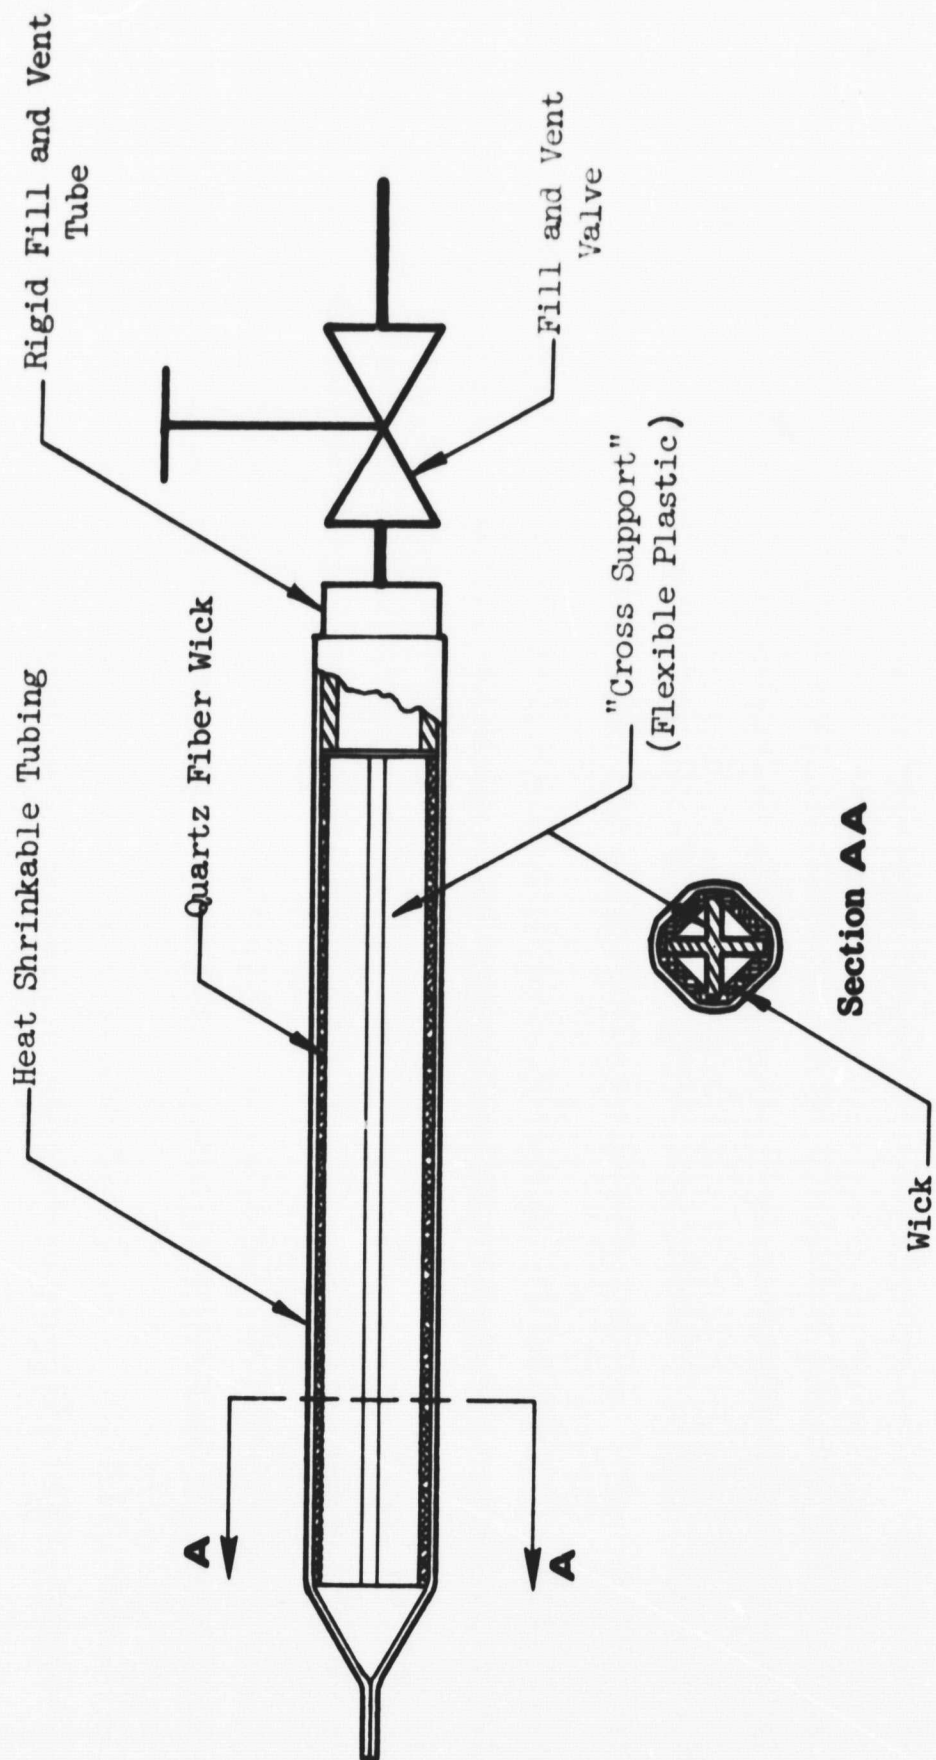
FLEXIBLE HEAT PIPE - CROSS-ROD SUPPORTED
